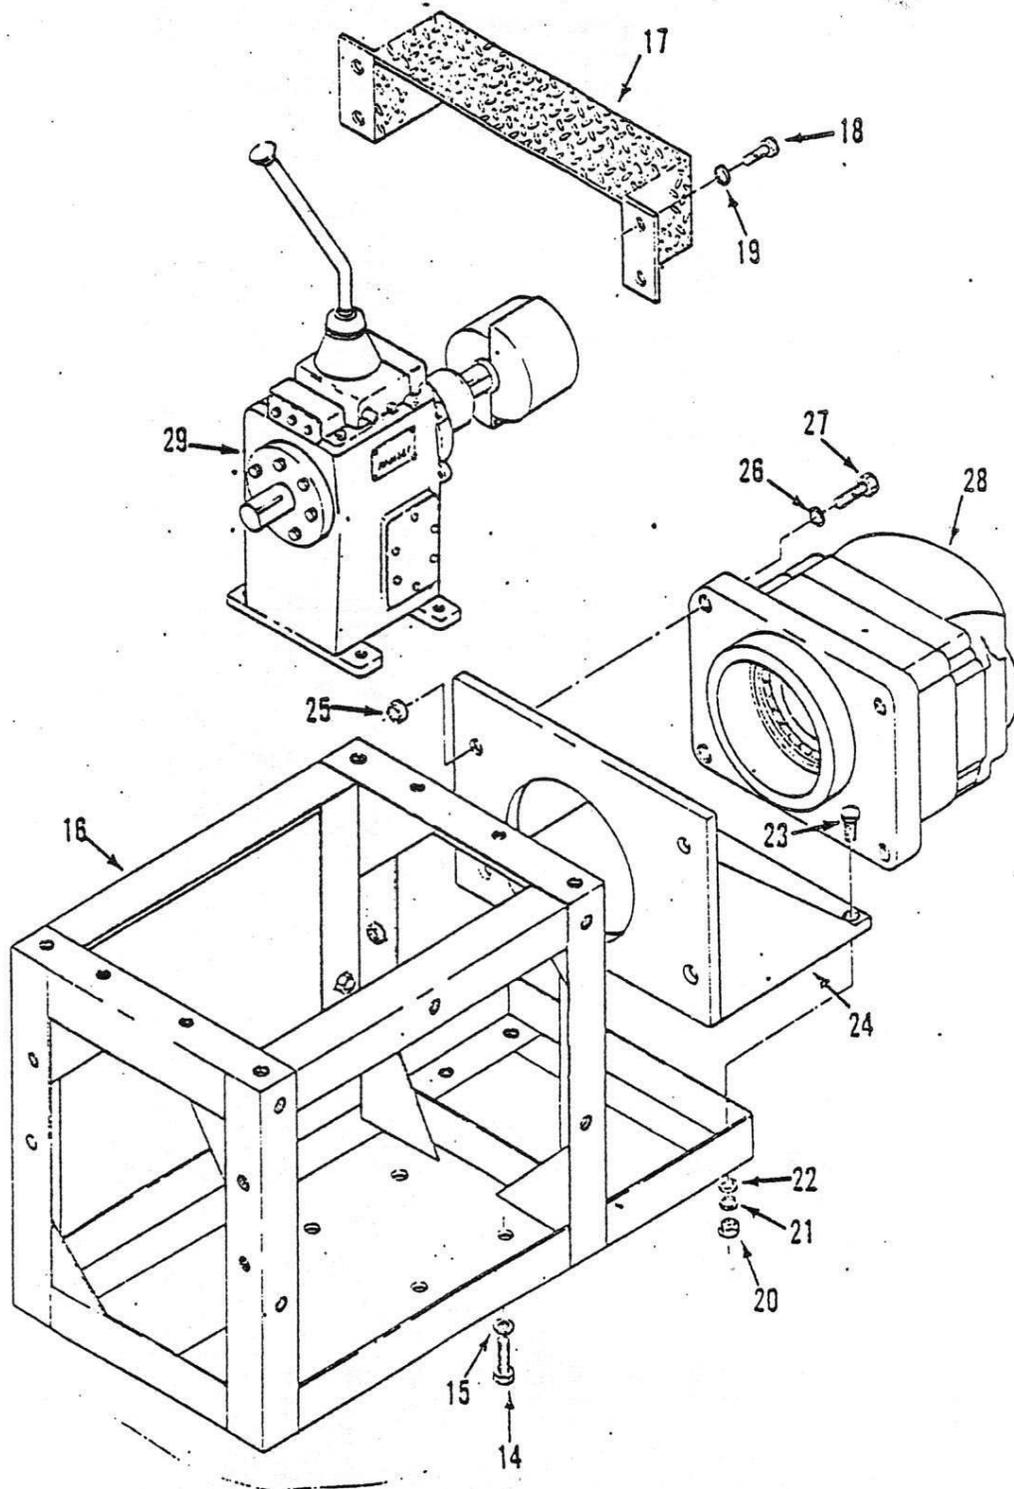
Cathode Drive Assembly (View 2 of 2)
